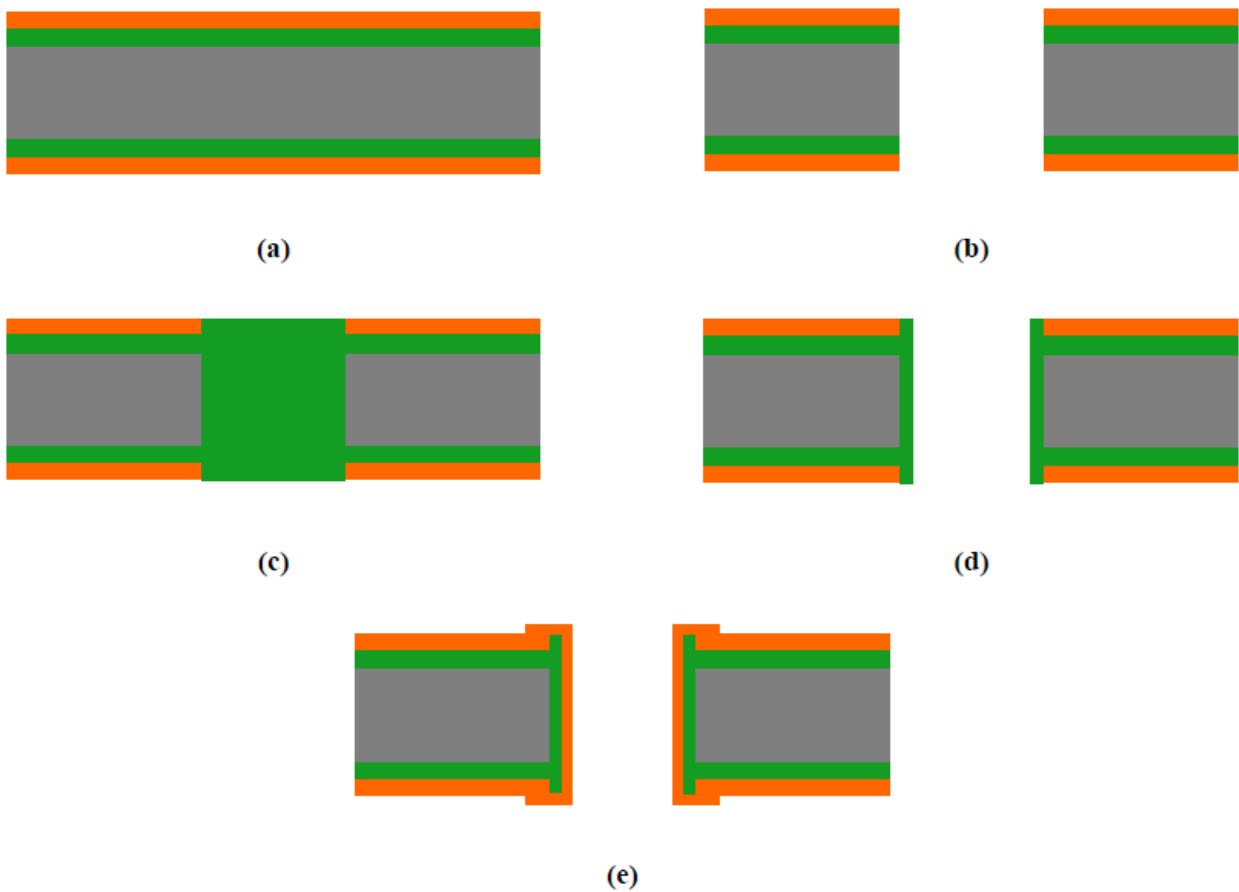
The fabrication process of the vias through PCBs with embedded core: (a) 2-layer PCB with embedded core, (b) first drilling with larger hole size, (c) filling epoxy into the hole, (d) second drilling with smaller hole size, (e) electroplating copper to form the via.
